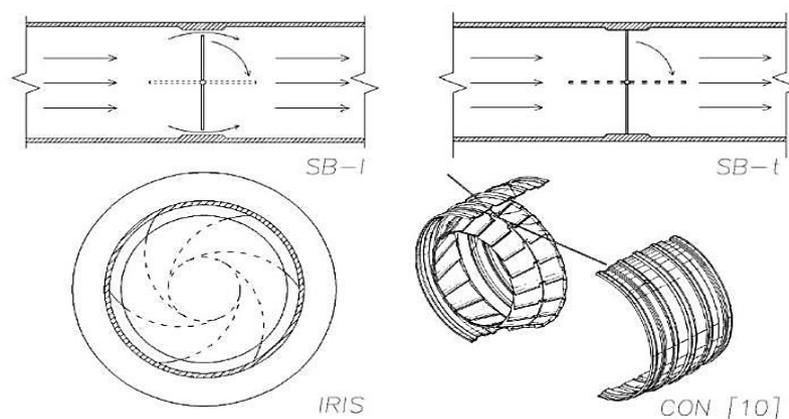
Schematic drawing of dampers used by Millers *et al.*, [18]
